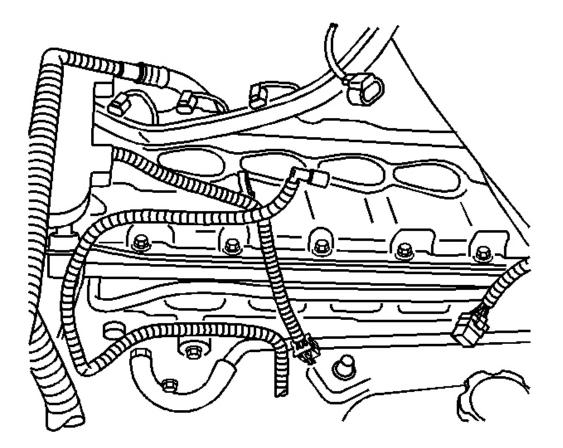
View Of Camshaft Cover Bolts Courtesy of GENERAL MOTORS CORP.
